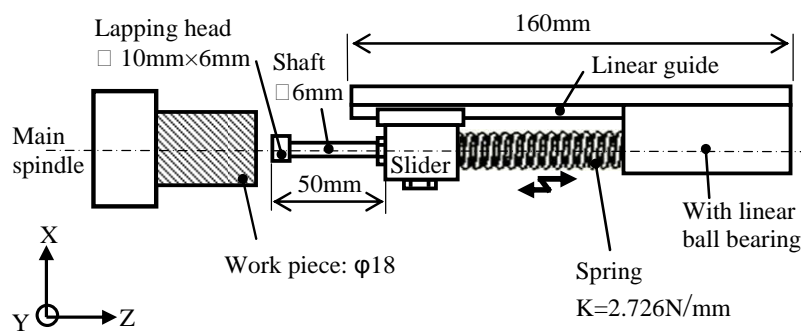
The Schematic view of lapping tool for mirror-like finish on cylindrical end surface
